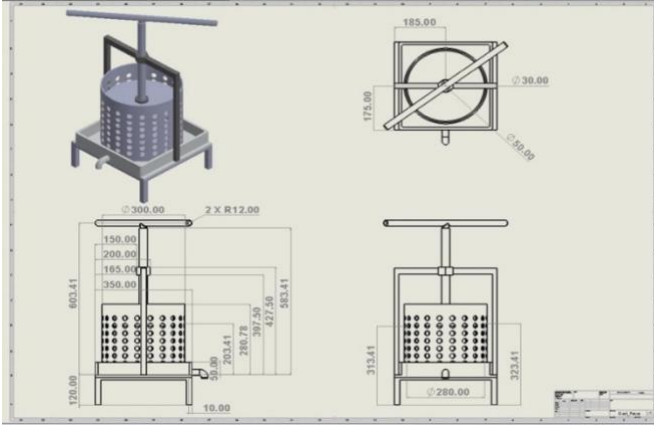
Shows the 3rd angle autographic projection with all detailed drawings and dimensions in mm.
